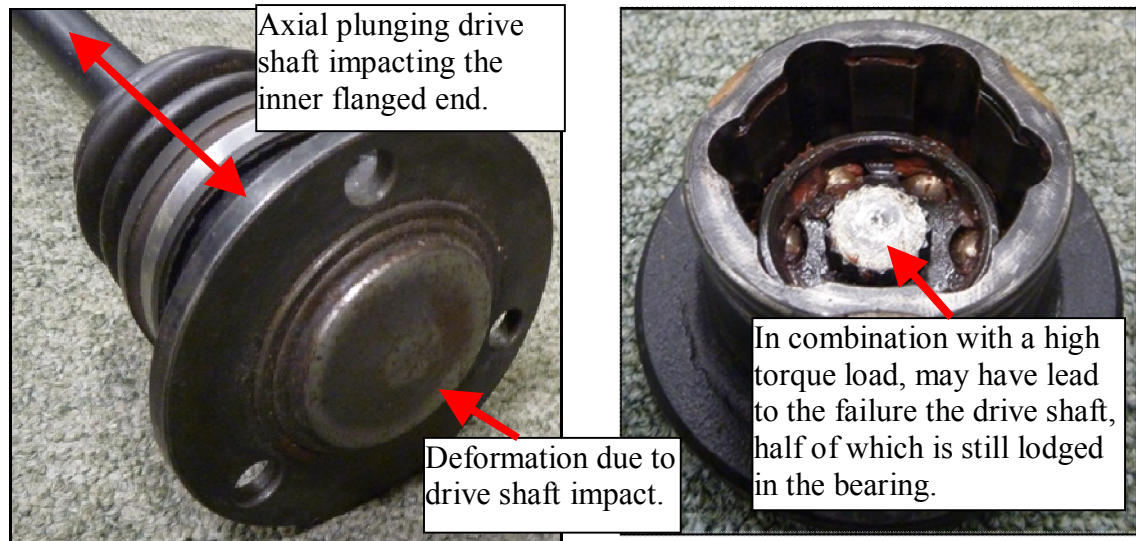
Failure of the flanged axial plunging inner CV joint.
